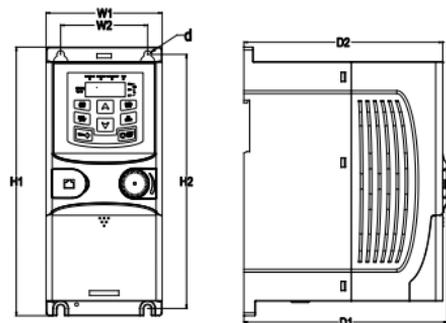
Wall mounting of 0.75–2.2kW inverters (Dimension unit: mm)
